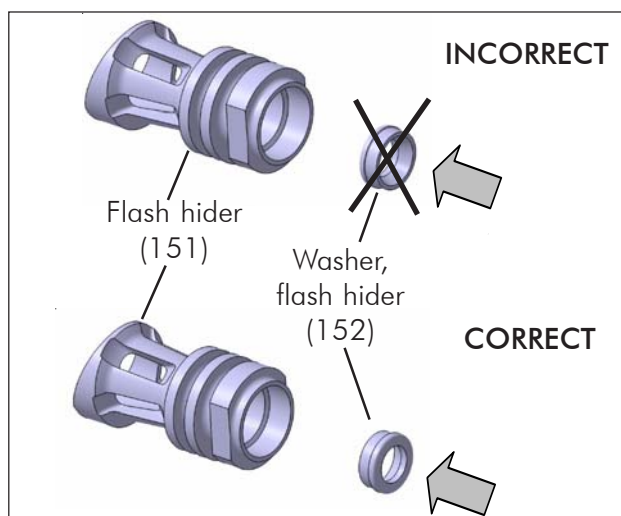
d - Reassembly of the washer, flash hider (152)
